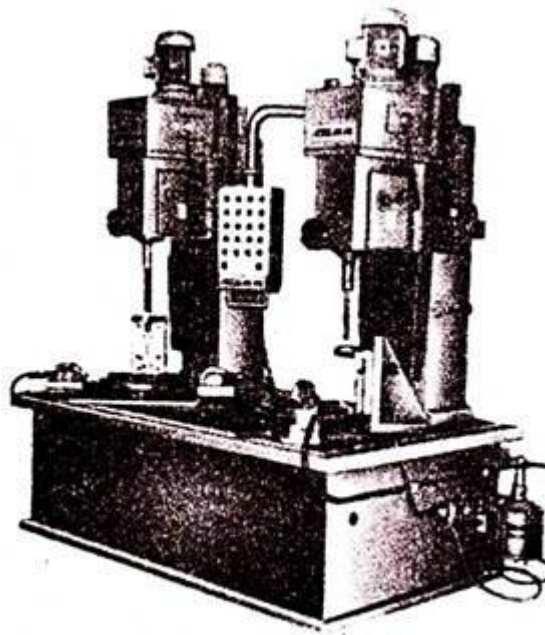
2-spindle vertical way type drilling and boring machine.
